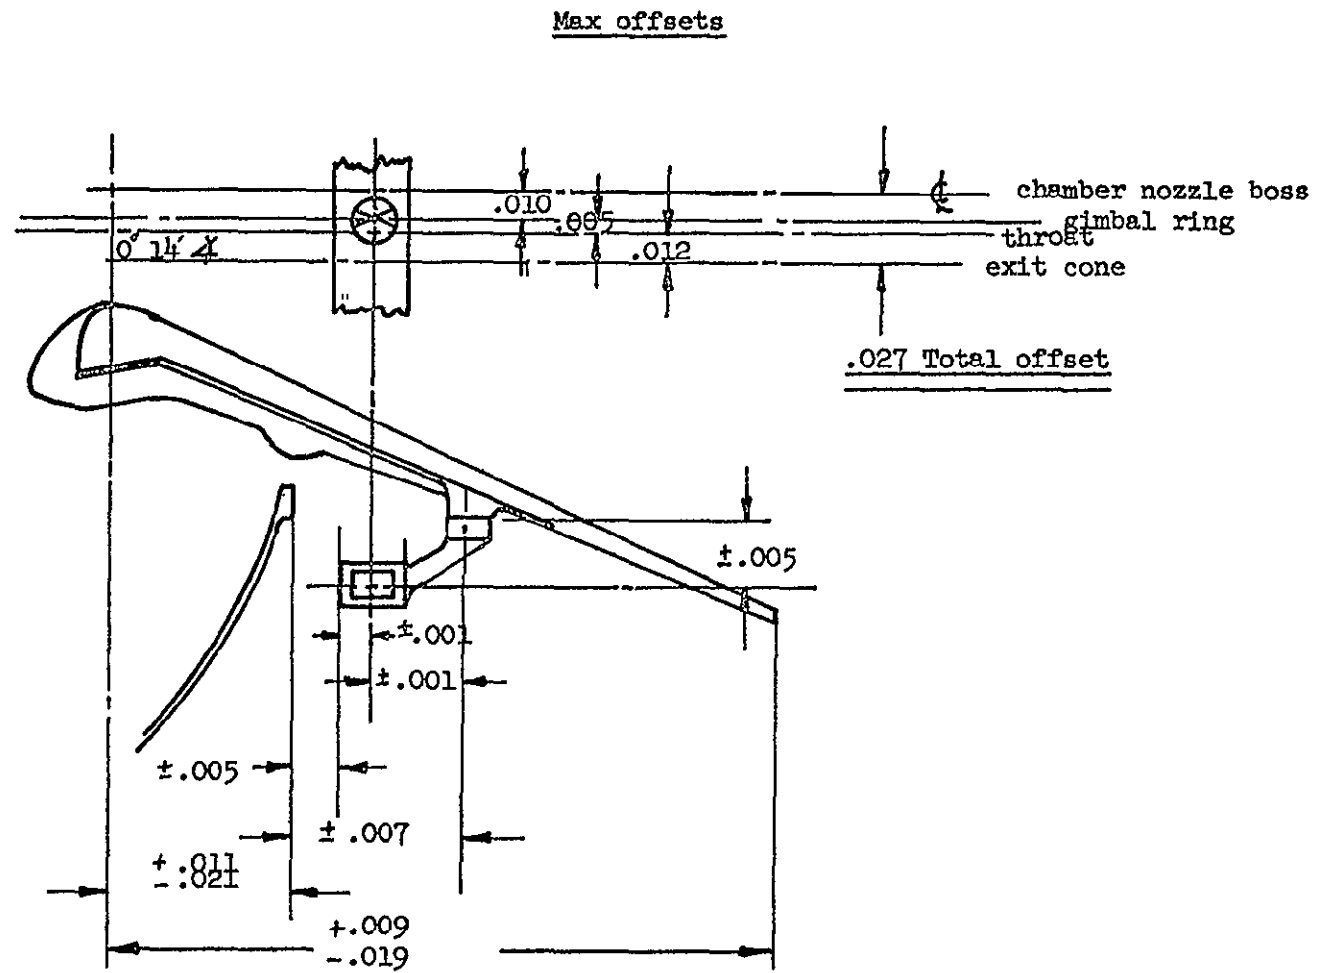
Dimensional Tolerance Stack-up for Gimbaled Nozzle
